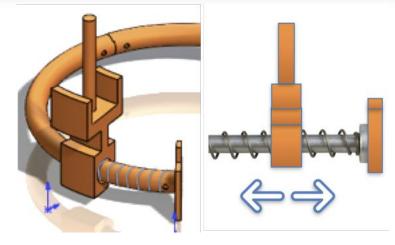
Inside the device, springs surround a cylindrical track. The springs are positioned so that they are stretched and compressed by the plungers as the user's jaw rotates.
